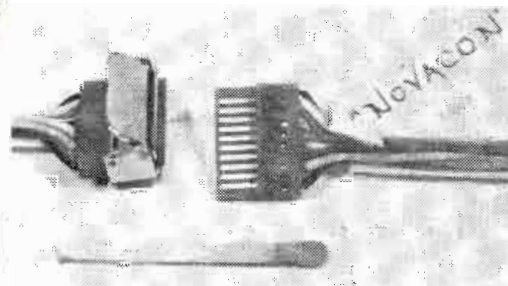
Closeup of subminiature male and female 10-conductor plug assembly
